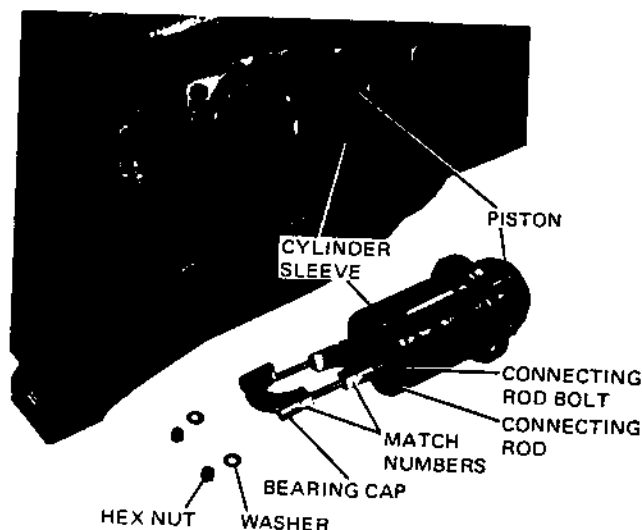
REMOVING PISTONS AND CONNECTING RODS
